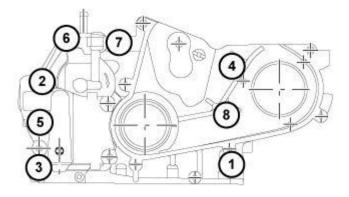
Front Cover, Gasket & Bolts Courtesy of CHRYSLER LLC
